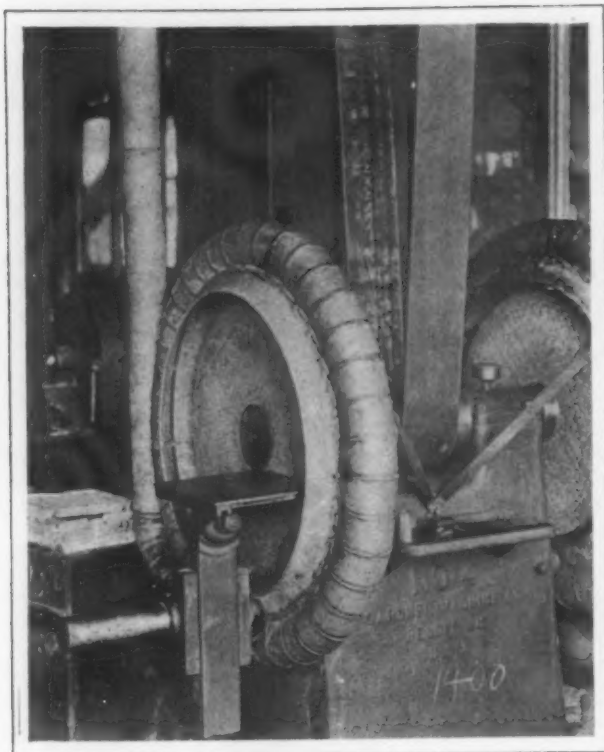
Novel Arrangement of Exhaustor Hood and Pipe for a Disk Grinding Machine
